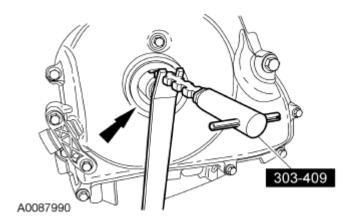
Locating Crankshaft Pulley Bolt Courtesy of FORD MOTOR CO.
